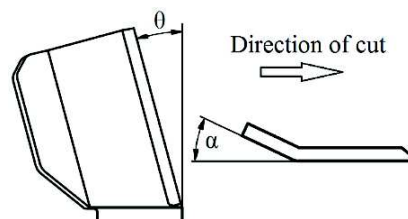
Schematically illustrated angles on the cutting tool – rake angle (θ) and trailing edge angle (α).
